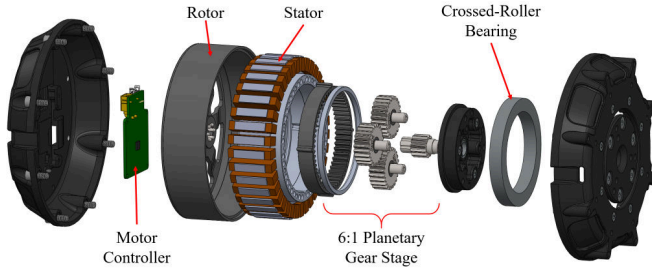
Exploded view of the U12 actuator. The motor controller sits behind the rotor and stator, inside the rear housing. The planetary gear stage sits within the hollow stator. A crossed-roller bearing supports the planet carrier and the output face of the actuator. The U10 actuator is smaller, but has a similar internal design.
